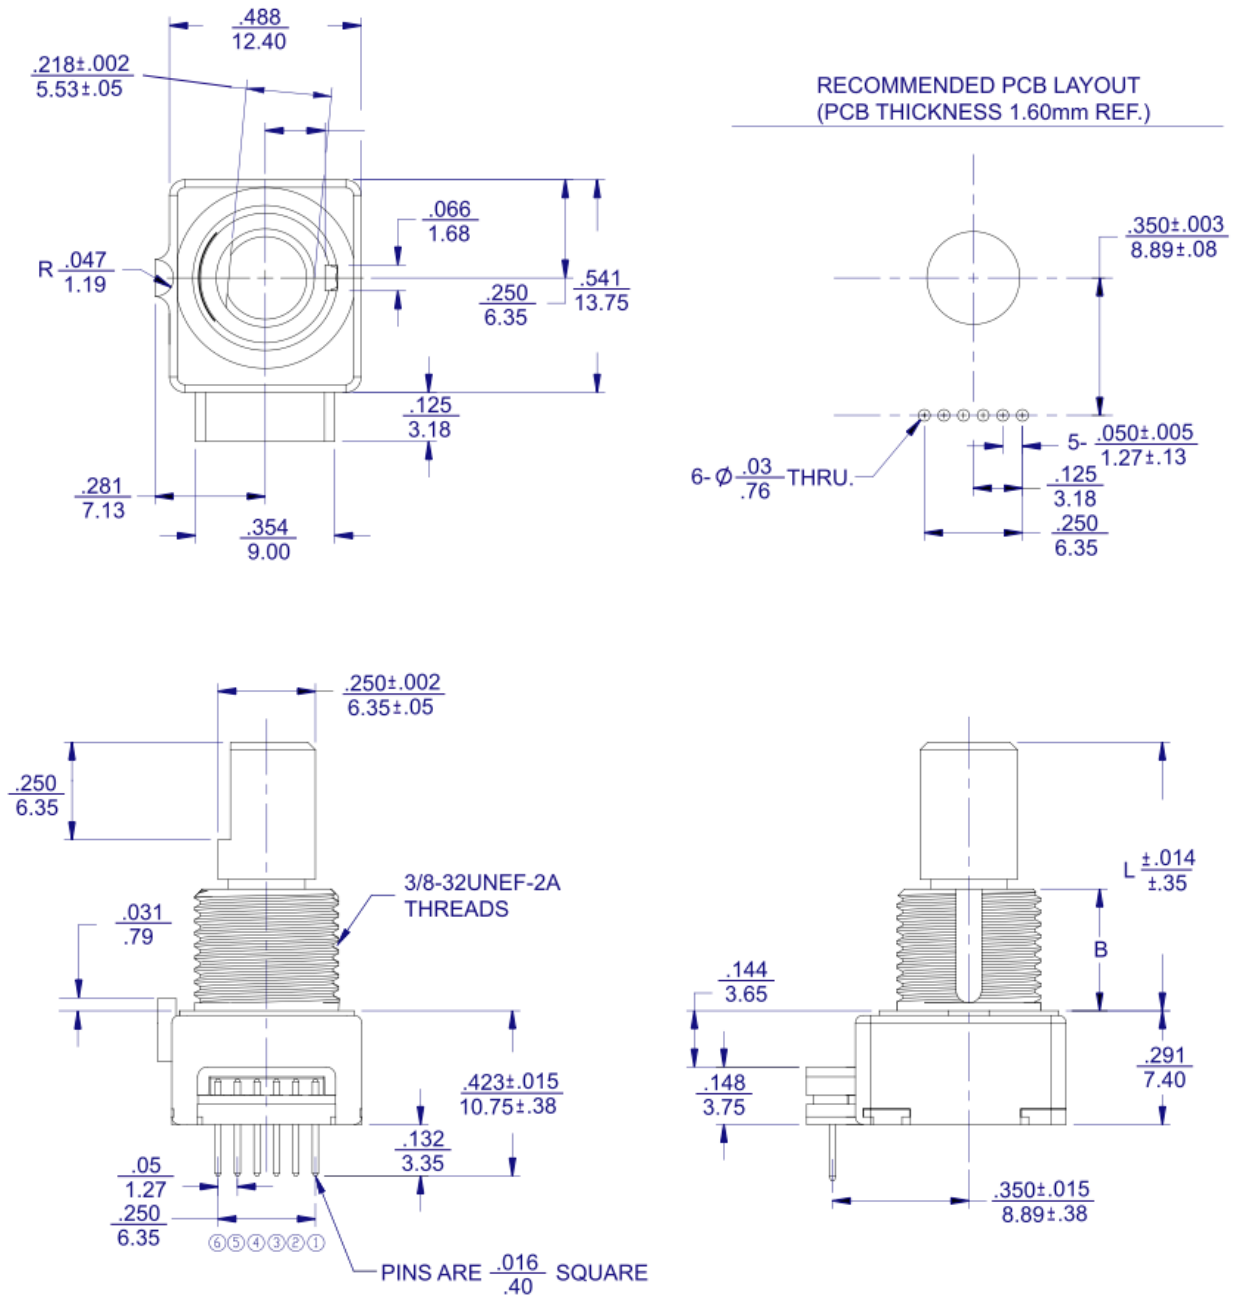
291V1...A – Without Schmitt Trigger, Without Locating Lug, .050" Pitch Pins Facing Rear
